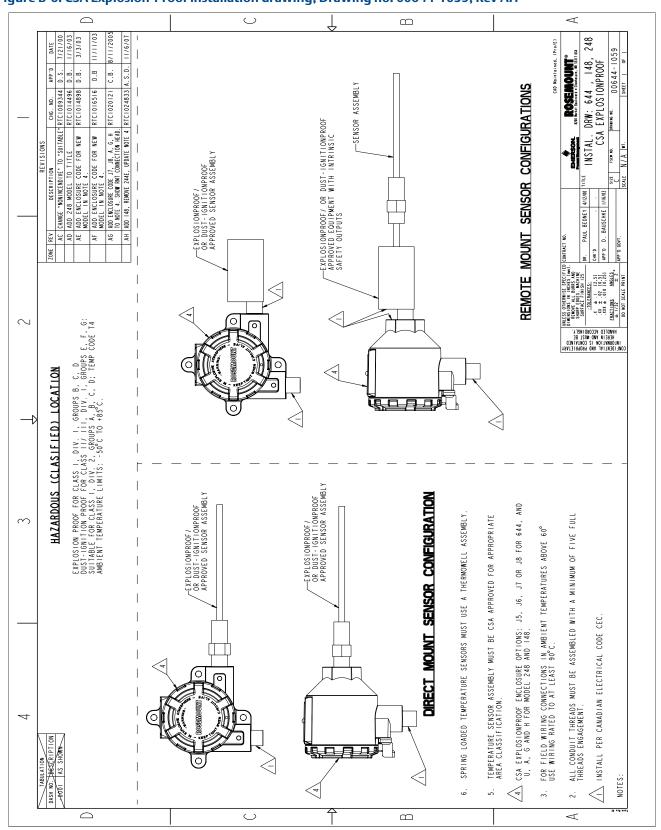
CSA Explosion-Proof installation drawing, Drawing no. 00644-1059, Rev AH
